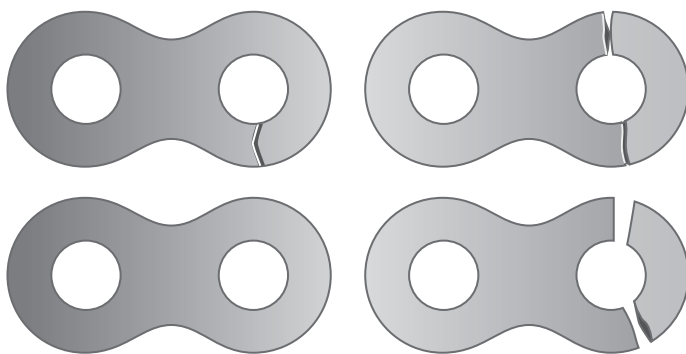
CRACKED PLATES RESULTING FROM FATIGUE FAILURE
